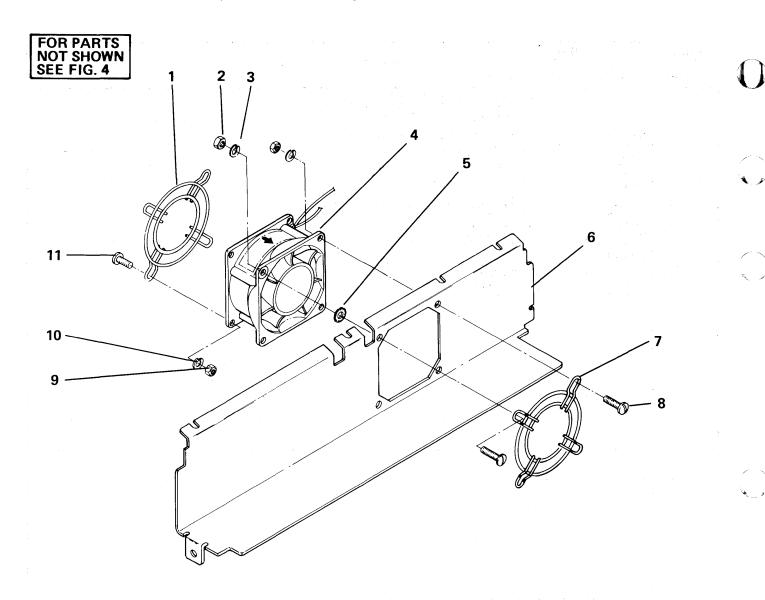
FAN ASSEMBLY. SEE LIST 9.
